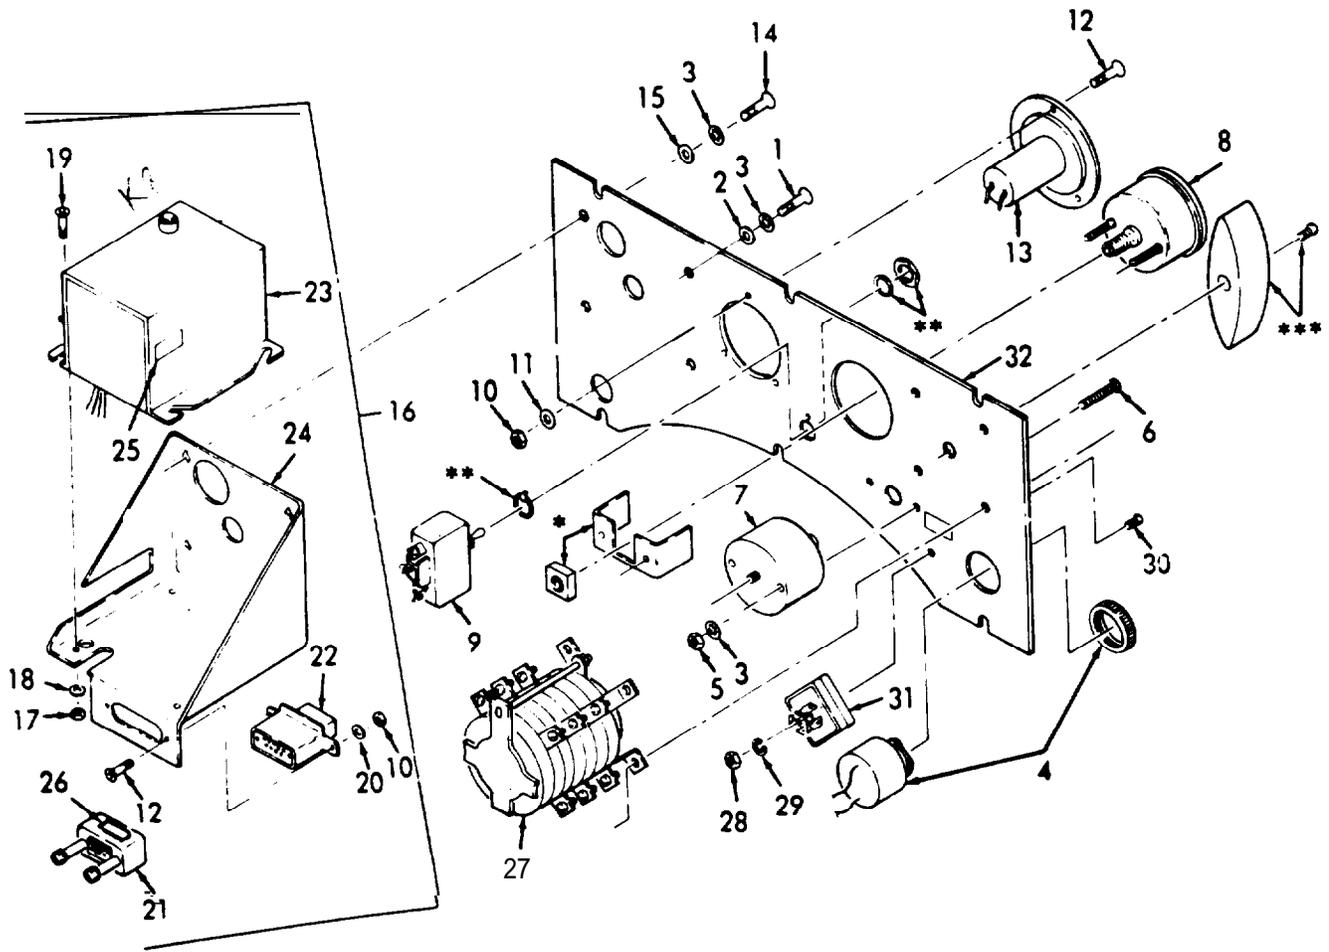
Cabinet Assembly (Sheet 2 of 2).
